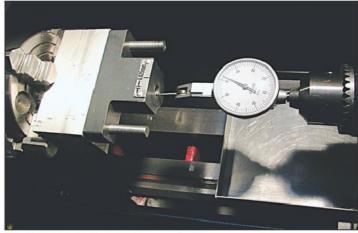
Original pinned to new ball bearing block clamped in four-jaw chuck.
